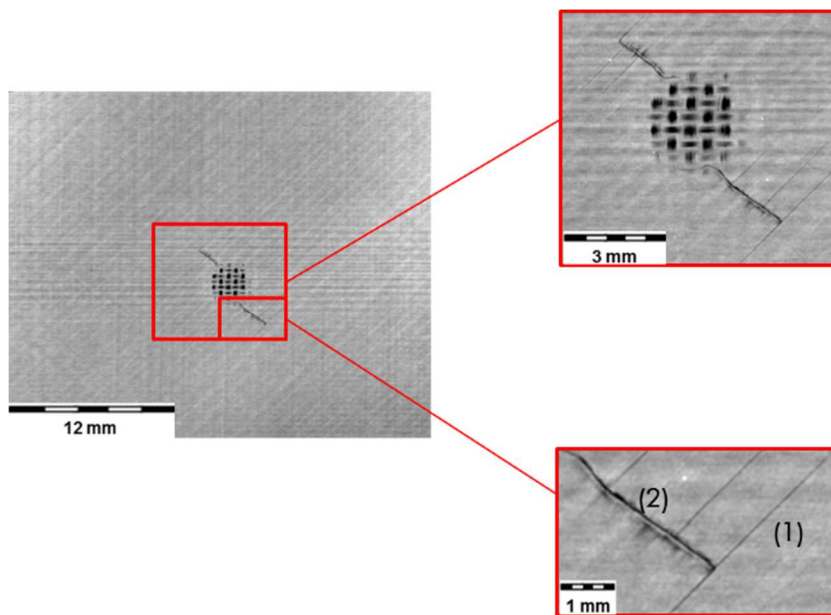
μ CT picture of an impact damage in a depth of 0.033 mm after an impact of 9.28 J . Top right: Detail view of the specimen on the left hand side. Intralaminar cracks transverse to the fiber direction and fiber cracks. Compressed area in the center. Bottom right: Details of intralaminar cracks transverse to fiber direction (1) and fiber cracks (2)
